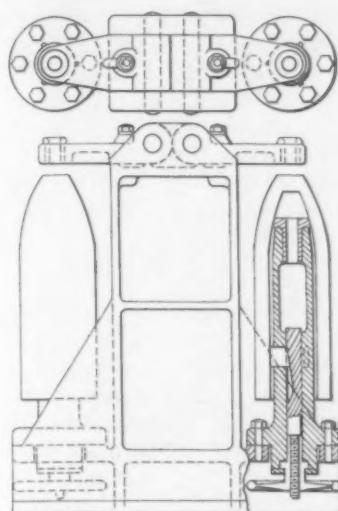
RADIAL DRILL FIXTURE PROVIDED FOR THE DRILLING OF THE HOLE IN THE NOSE END OF LARGE, HIGH EXPLOSIVE SHELLS.
